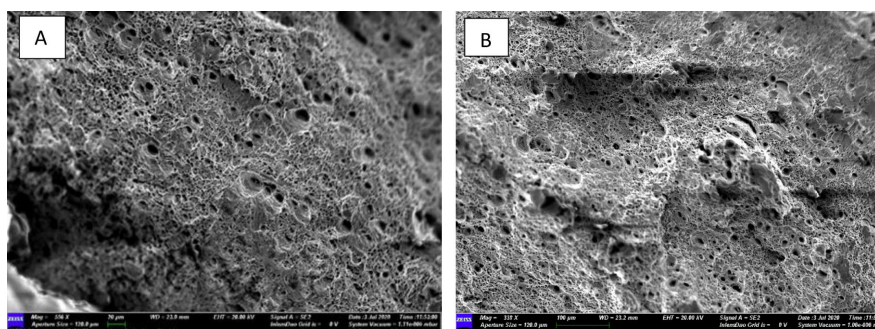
Fracture surfaces of the tensile test sample welded with (A) 0.45 kJ/mm and (B) 0.54 kJ/mm heat input (secondary electron images)
